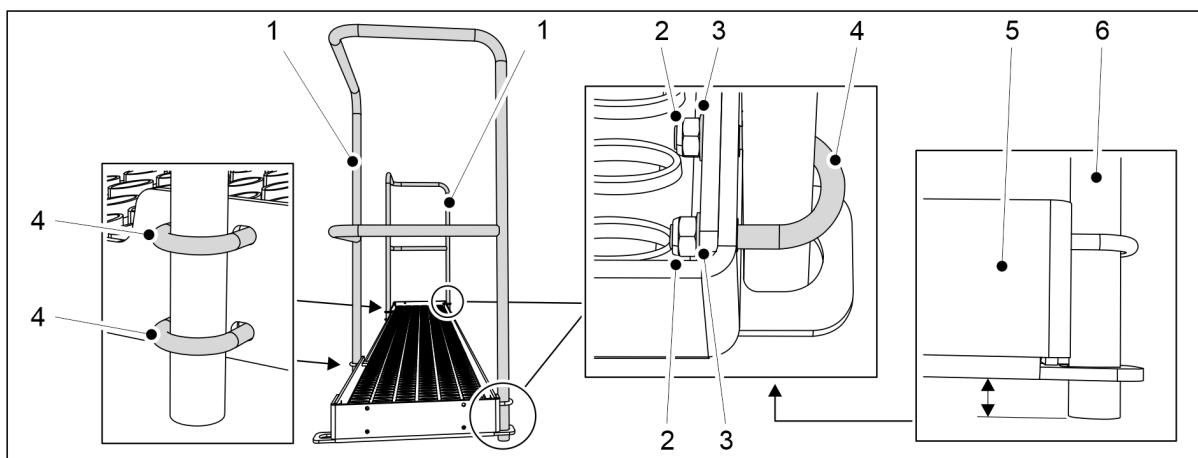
77. Mounting handrails on a CEREX 400 EVO machine
